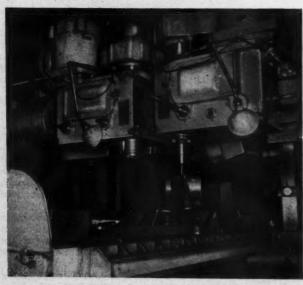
A close-up view of the front heads of a special Milwaukee milling machine for operations on the guiding surfaces of machine tool slides
